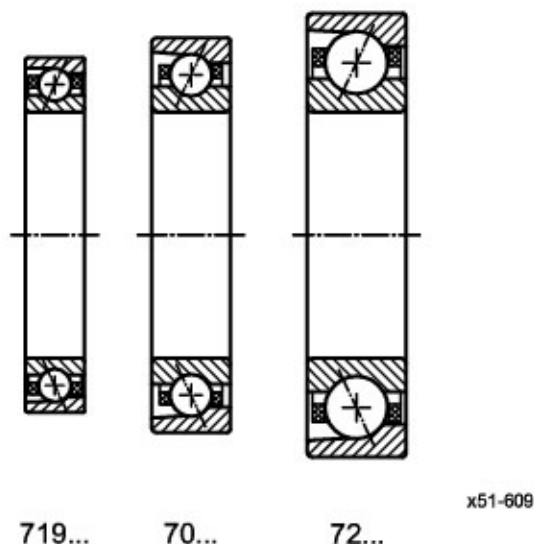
Dimensional series for NIBC Super Precision Angular Contact Ball Bearings
